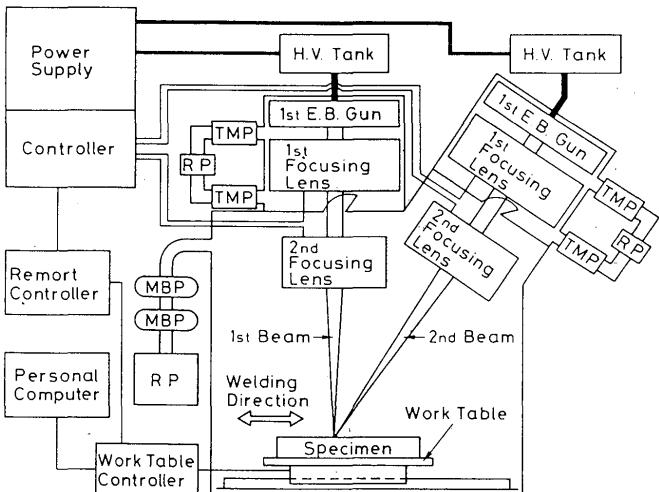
30 kW class Tandem Electron Beam welder.
